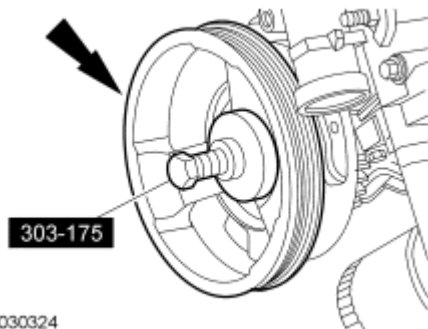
Installing Crankshaft Pulley Using Special Tool (303--175)
